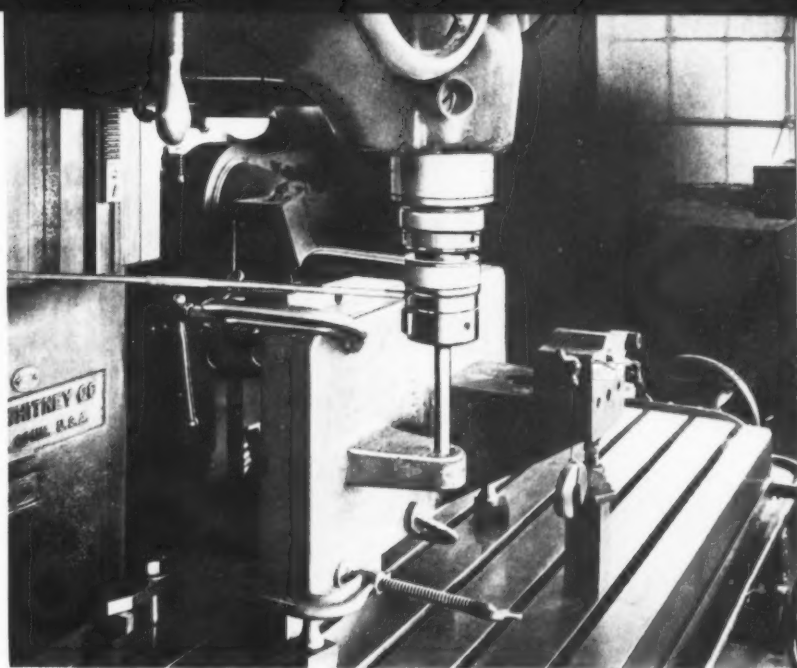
Jig Borers are Used in the Tool-room for the Accurate Machining of the Jigs and Fixtures
